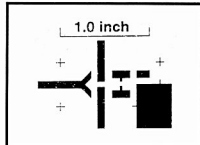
PCB Etching Pattern for 1/32 inch Teflon Board.
